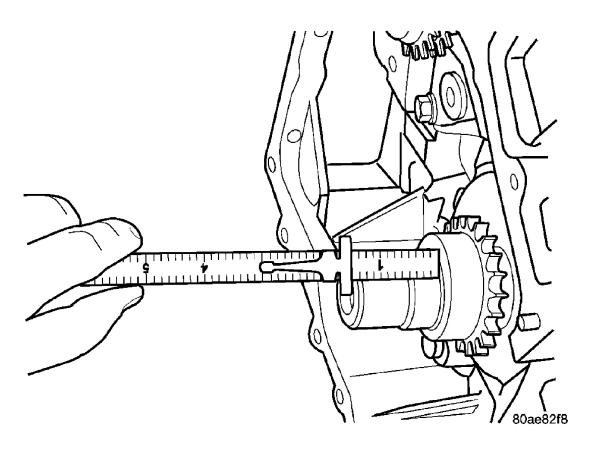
Checking Crankshaft Sprocket Depth Measurement Courtesy of CHRYSLER LLC
